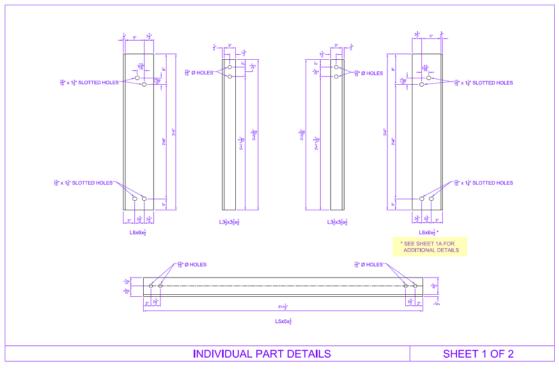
Engineering Drawing. Fabricated k-frame replica (1 of 3)
